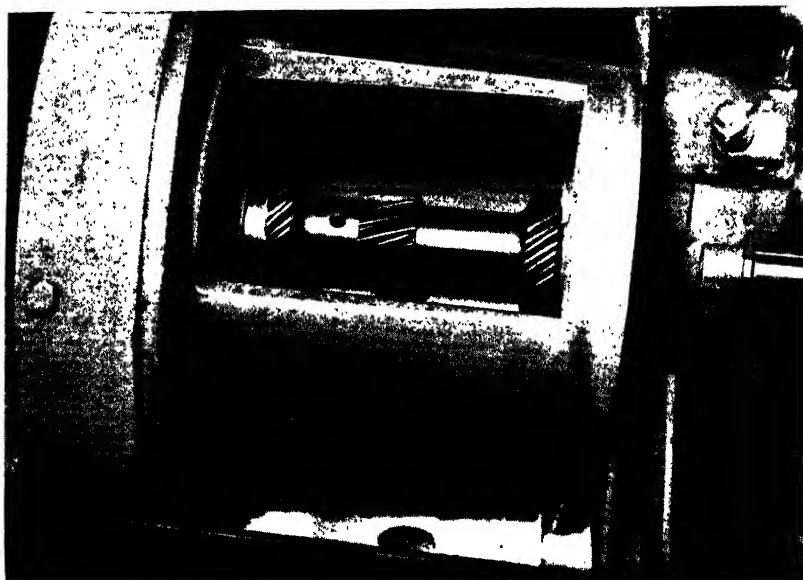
Grinding Bores of Countershaft Clutch Gears
